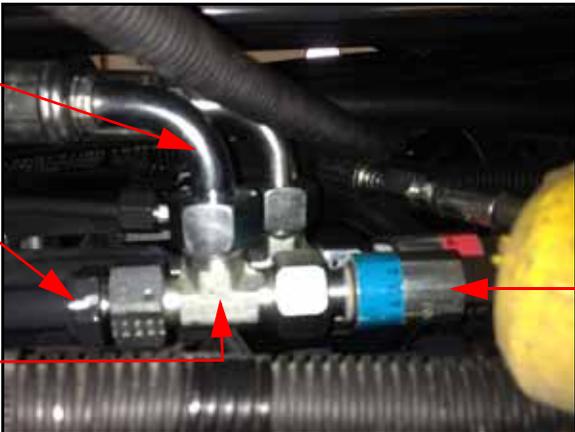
Tank Hoses Installed on Steel Tank Line
